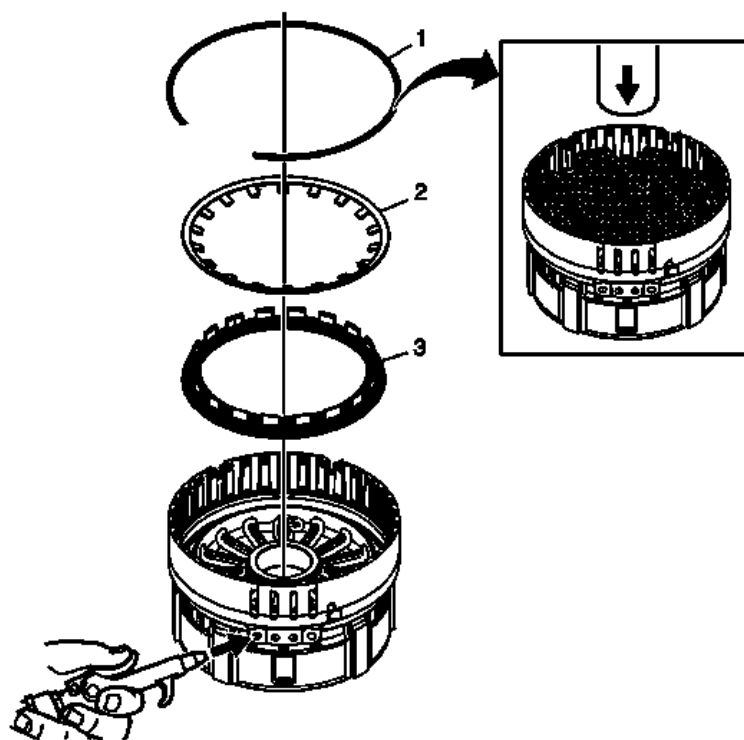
Identifying 4th Clutch Accumulator Piston Assembly
